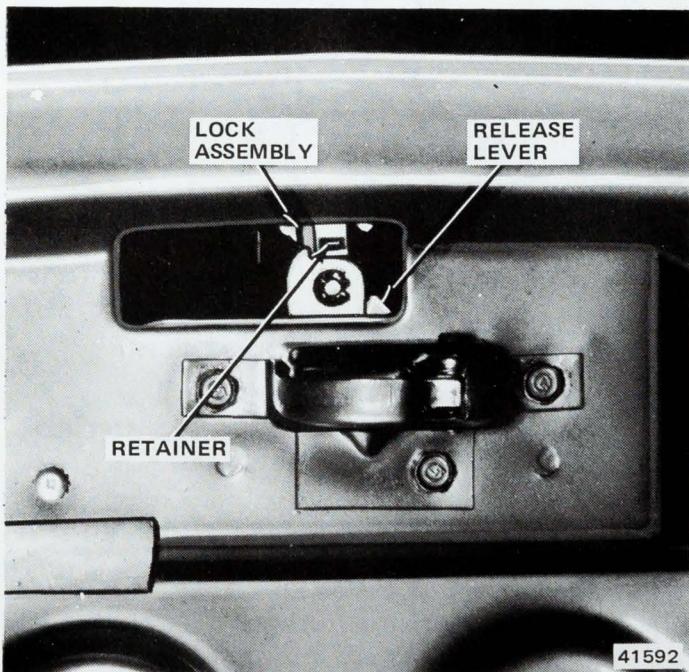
H-49 Key Lock Assembly—Matador Sedan
